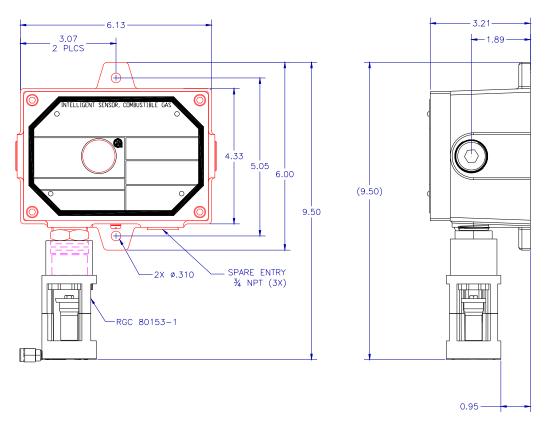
RGC (80153-1) with S4000CH Dimensions and Outline Drawing
